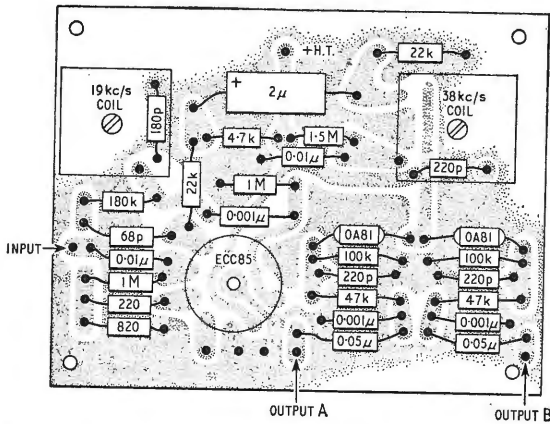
Suggested layout of the circuit in Fig. 6 using a printed board.
